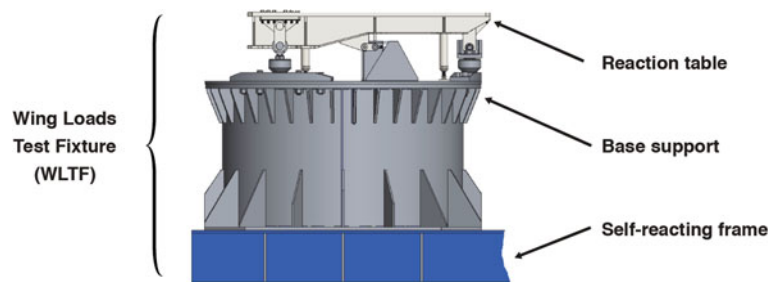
Side view of the dynamically active static Wing Loads Test Fixture
